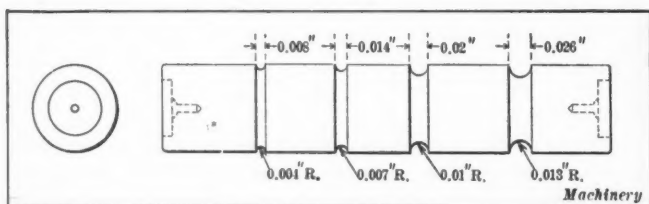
Master Bar for testing Radius on Point of Thread Tools
